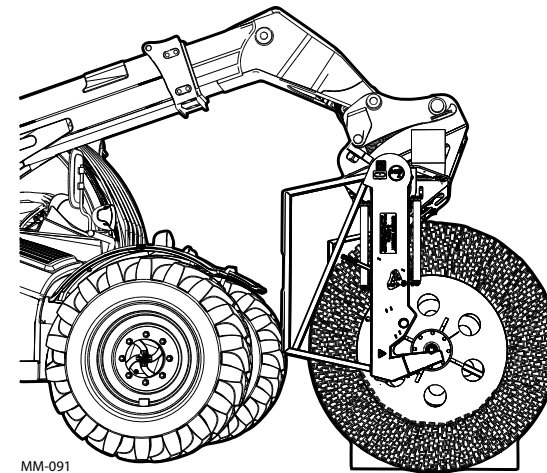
Arm Horns Underneath the Spool Shafts
